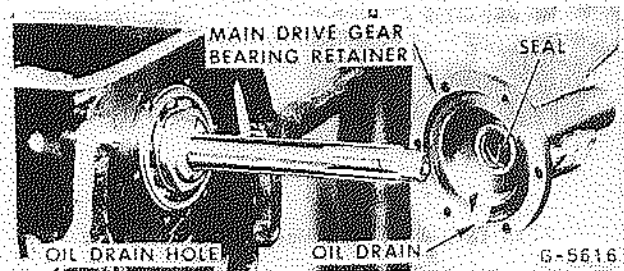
Removing Main Drive Gear Bearing Retainer
